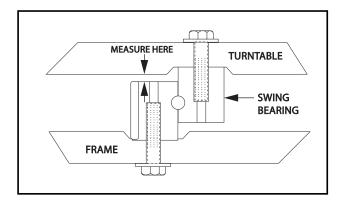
Swing Bearing Tolerance Measuring Point
